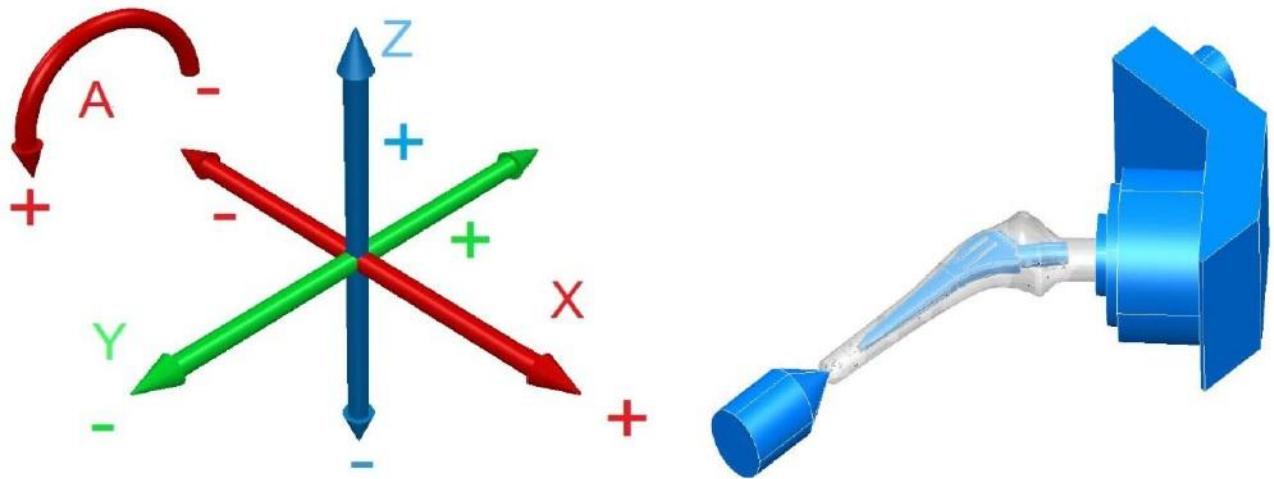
Realizing of manufacturing hip implant with the 4-axis machining technology
